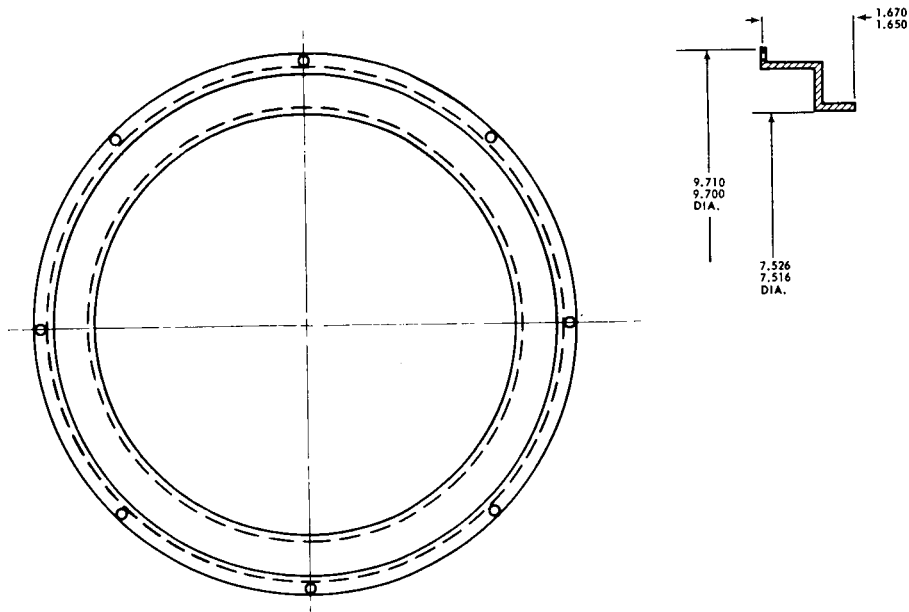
Assembly Guard for Externally Pressurized Hydrostatic Seal
